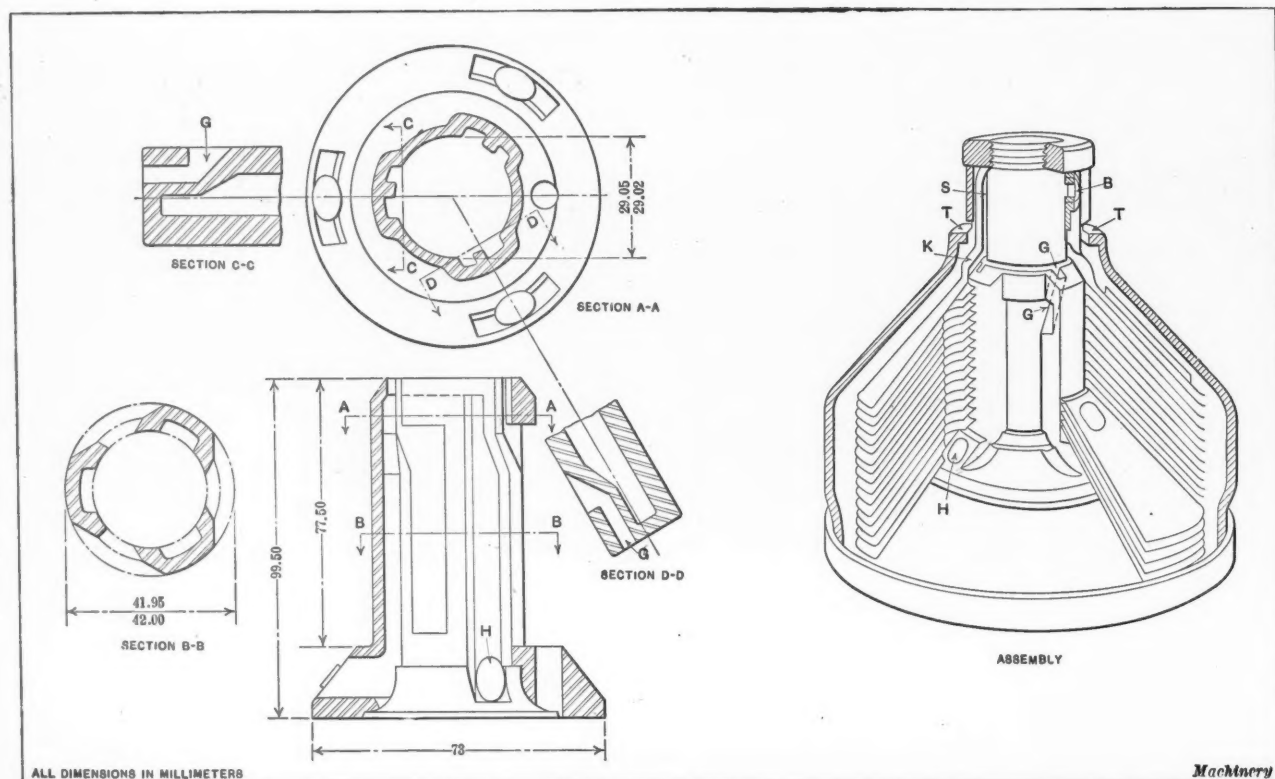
Sectional View of the Cream Distributor and a Sectional View of the Assembled Bowl Unit showing the Relation of Cones to the Passages in the Distributor
